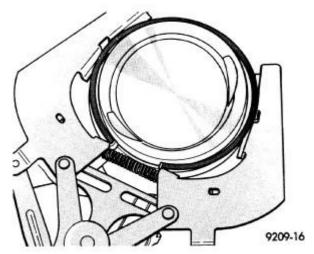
PISTON AND CONNECTING ROD Courtesy of CHRYSLER LLC
